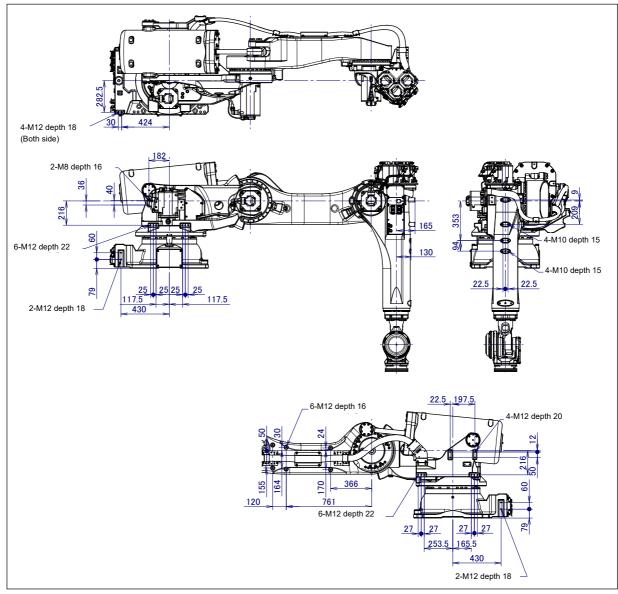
(f) Equipment mounting faces (R-2000iC/270R)
